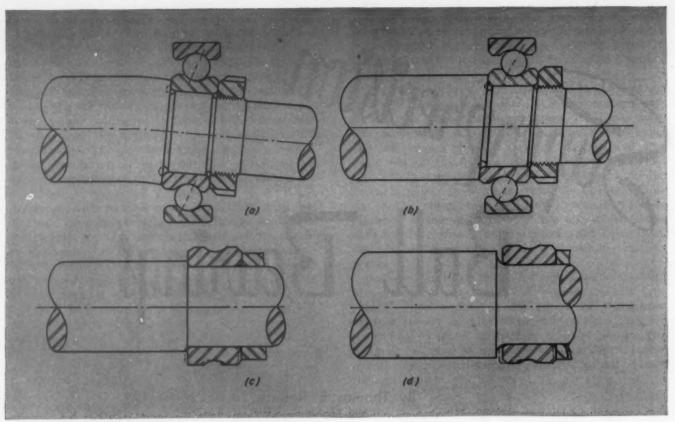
Various causes of rotating inner ring misalignment. Exessive shaft deflection condition is shown somewhat exaggerated at (a), out-of-square shoulder condition at (b), insufficient shoulder condition at (c), and oversize shaft fillet condition at (d)
